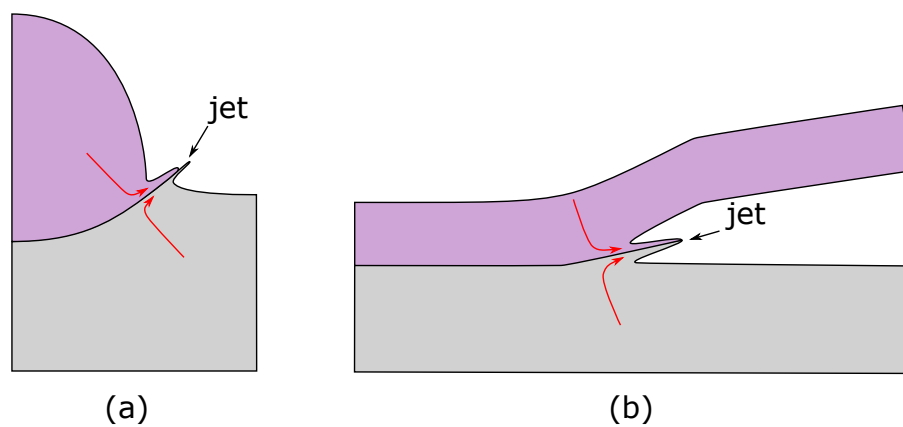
Deformation localisation due to the Adiabatic Shear Instability during: (a) cold spraying, (b) explosive welding. Adapted from [122].
